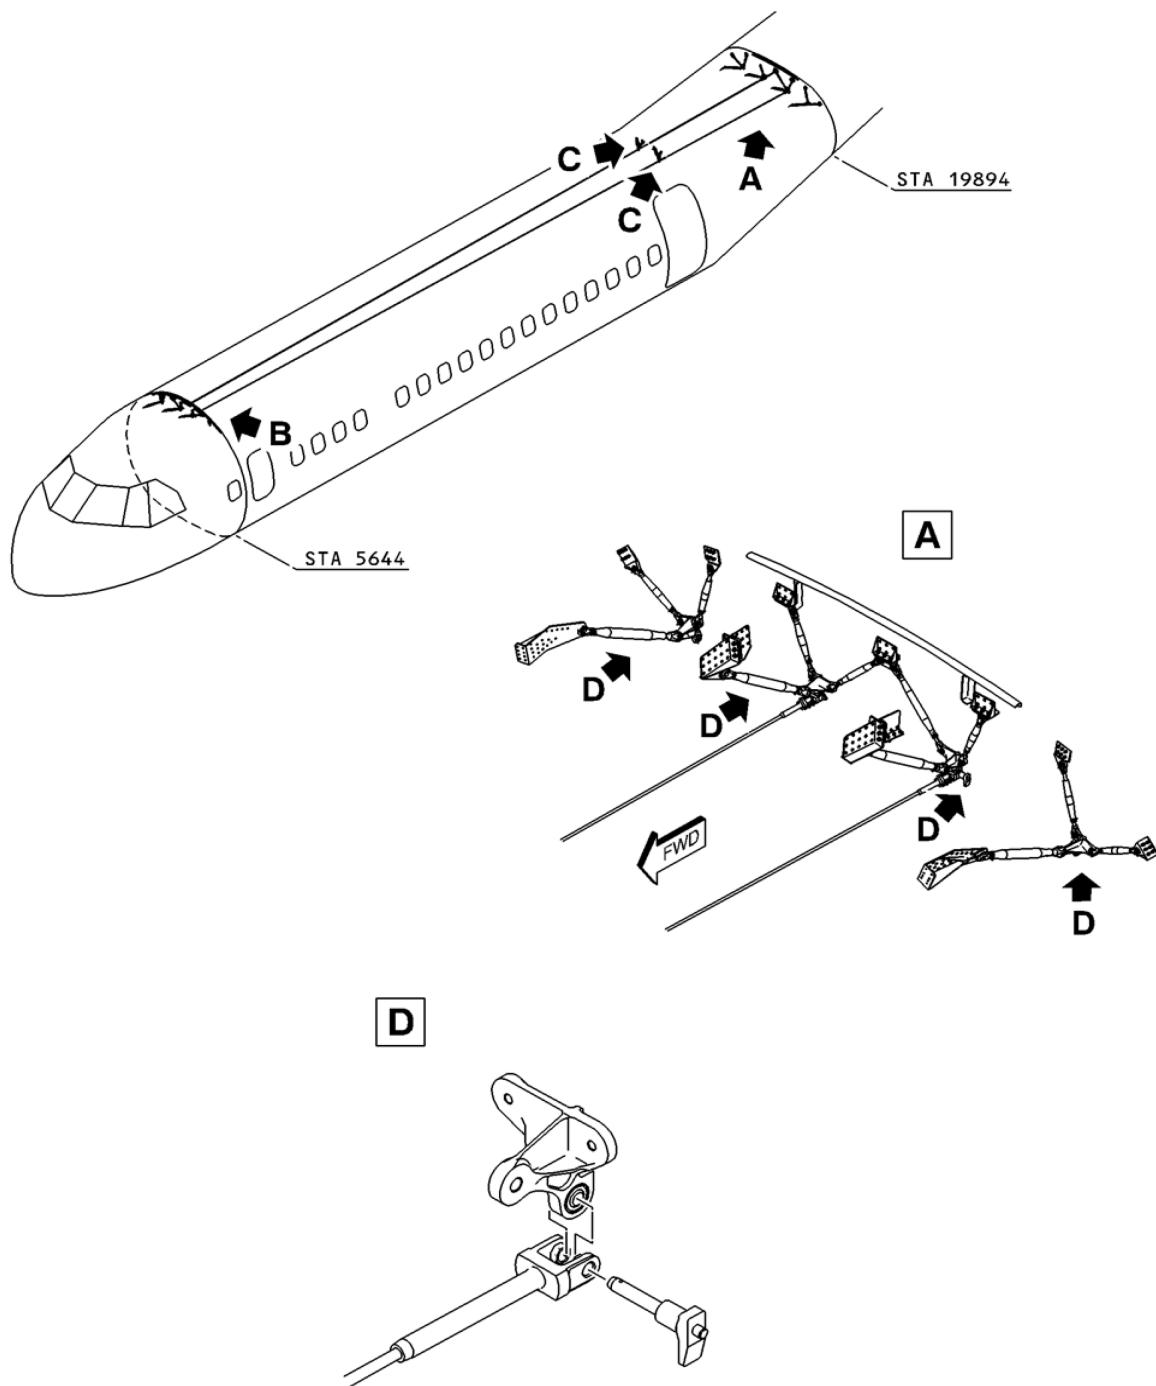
Installation of the static line anchor cables (Sheet 1 of 2)
